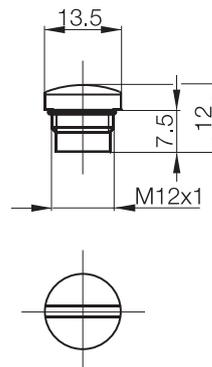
Closing cap BKS 12-CS-01 for BUS OUT
